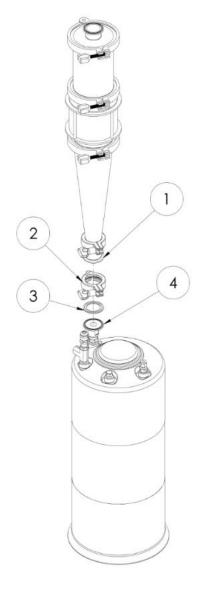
Post collector vapor expansion tank flange (4) connects to the fluidized bed flange (1) with a triclamp sanitary flange (2) and 1-1/2" nitrile gasket (3).
